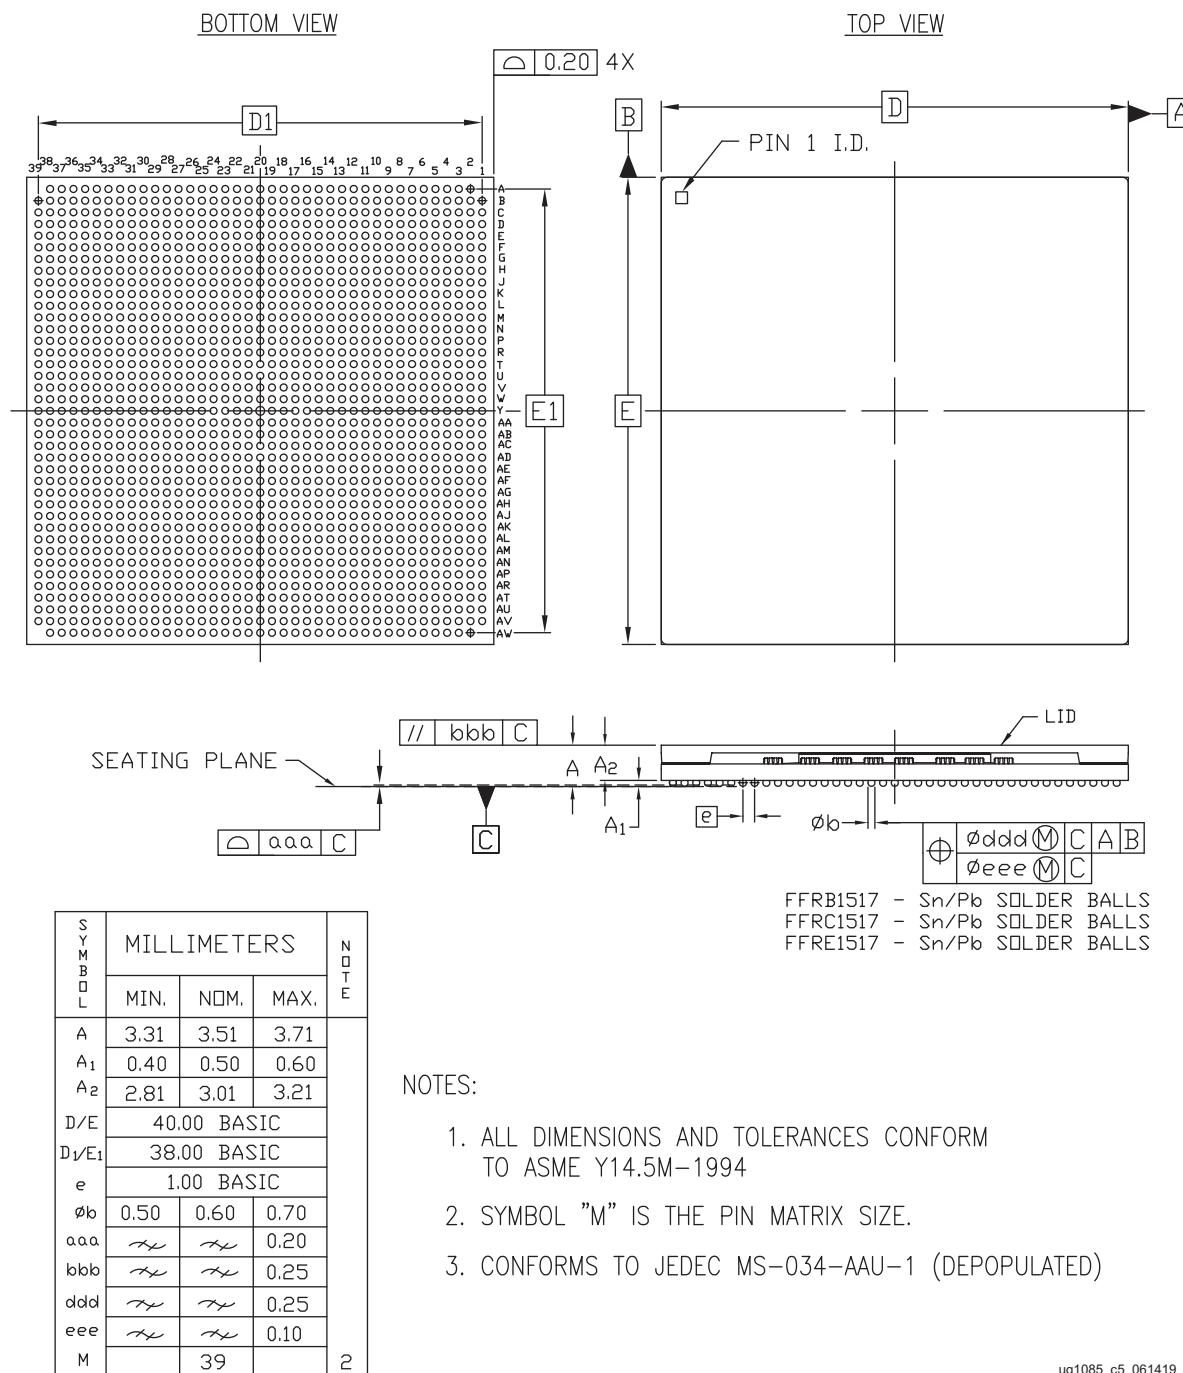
Package Dimensions for FFRB1517 (XQZU19EG)
